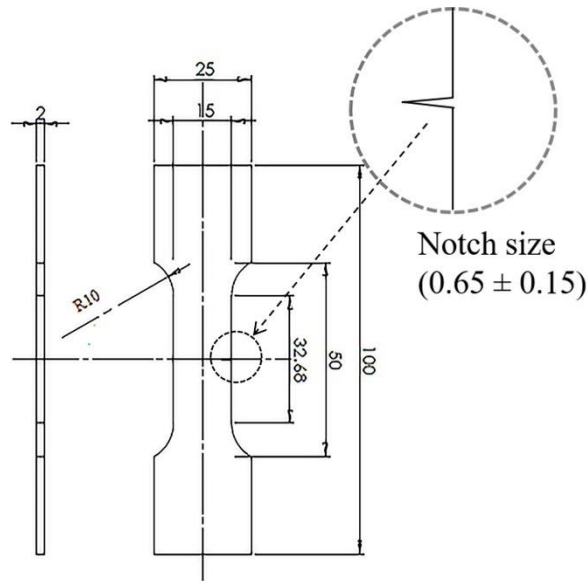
Single-edge notched tensile specimens (SENT) for fatigue crack growth test (Dimension in mm).
